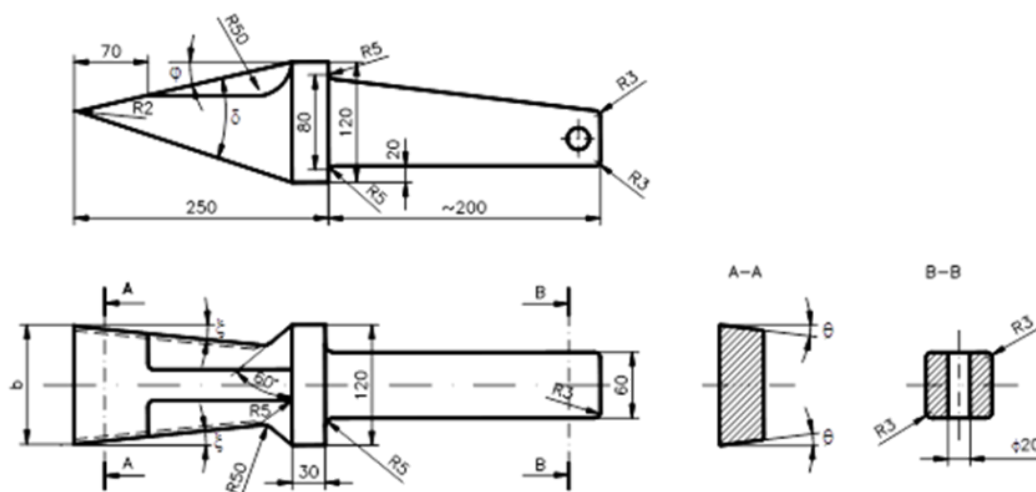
Dimensions and parameters of a chisel type BWE cutting teeth
